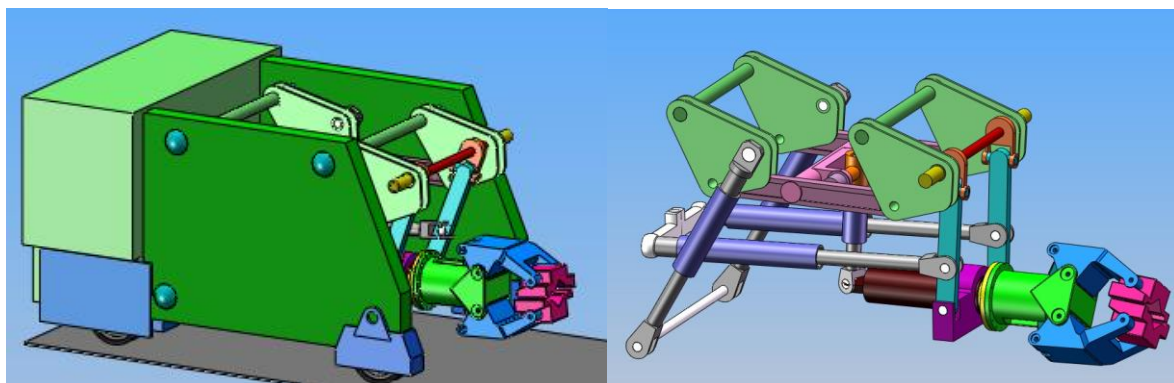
Virtual prototype for the new forging manipulator with the mechanism shown in Fig. 7-12(a)
